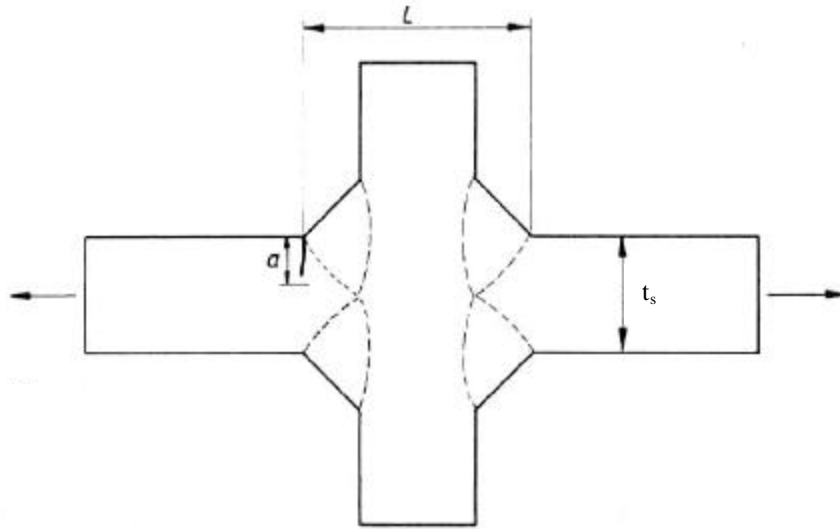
Weld Toe Crack at Cruciform Joint with Full Penetration K-Butt Weld
